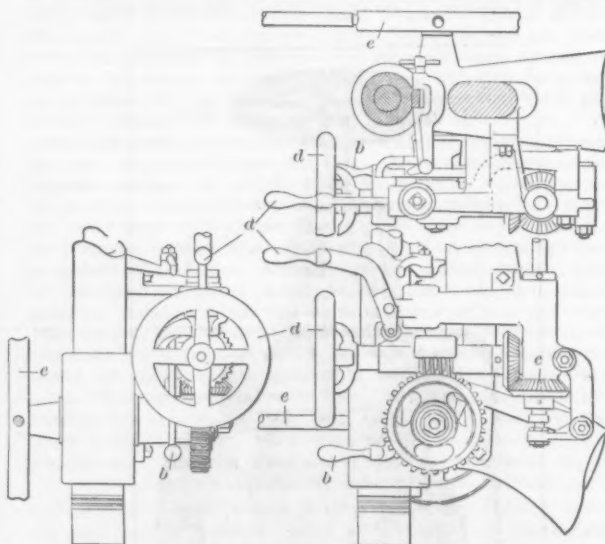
Top View and Side and End Elevations of the Feeding Mechanism.
